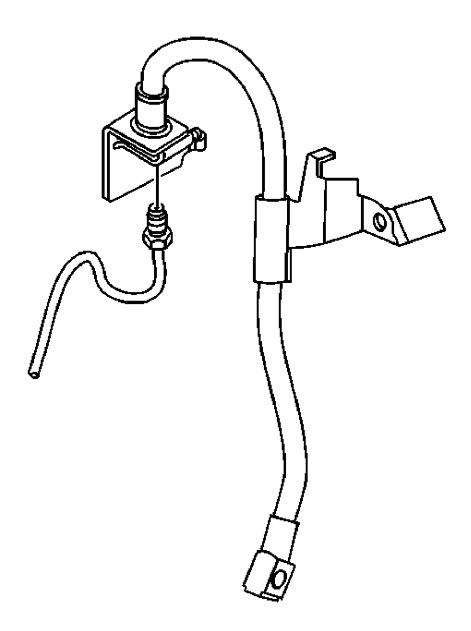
Removing/Installing Brake Pipe Fitting To/From Brake Hose Courtesy of GENERAL MOTORS CORP.
